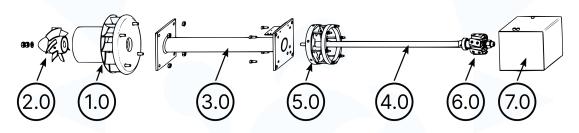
Overview of the main parts and their corresponding number in the technical drawings
